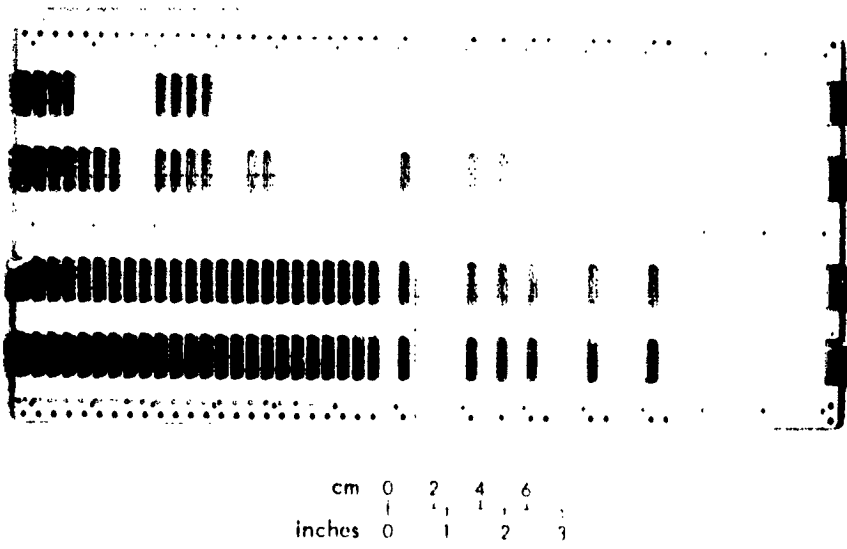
Support Plate With Back Side Mounted Connectors (front view)
